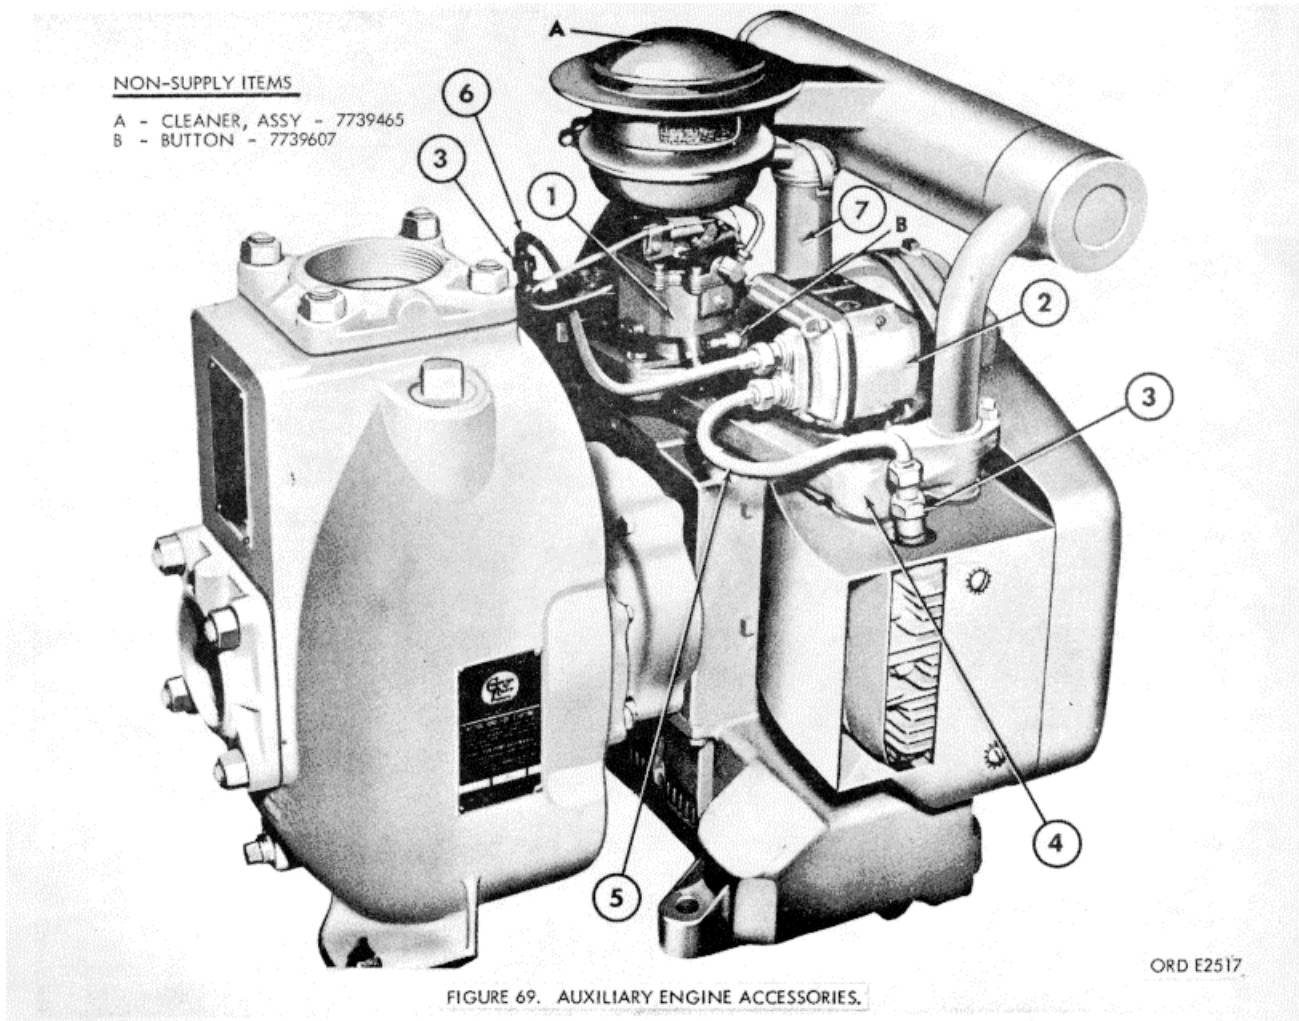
AUXILIARY ENGINE ACCESSORIES,
